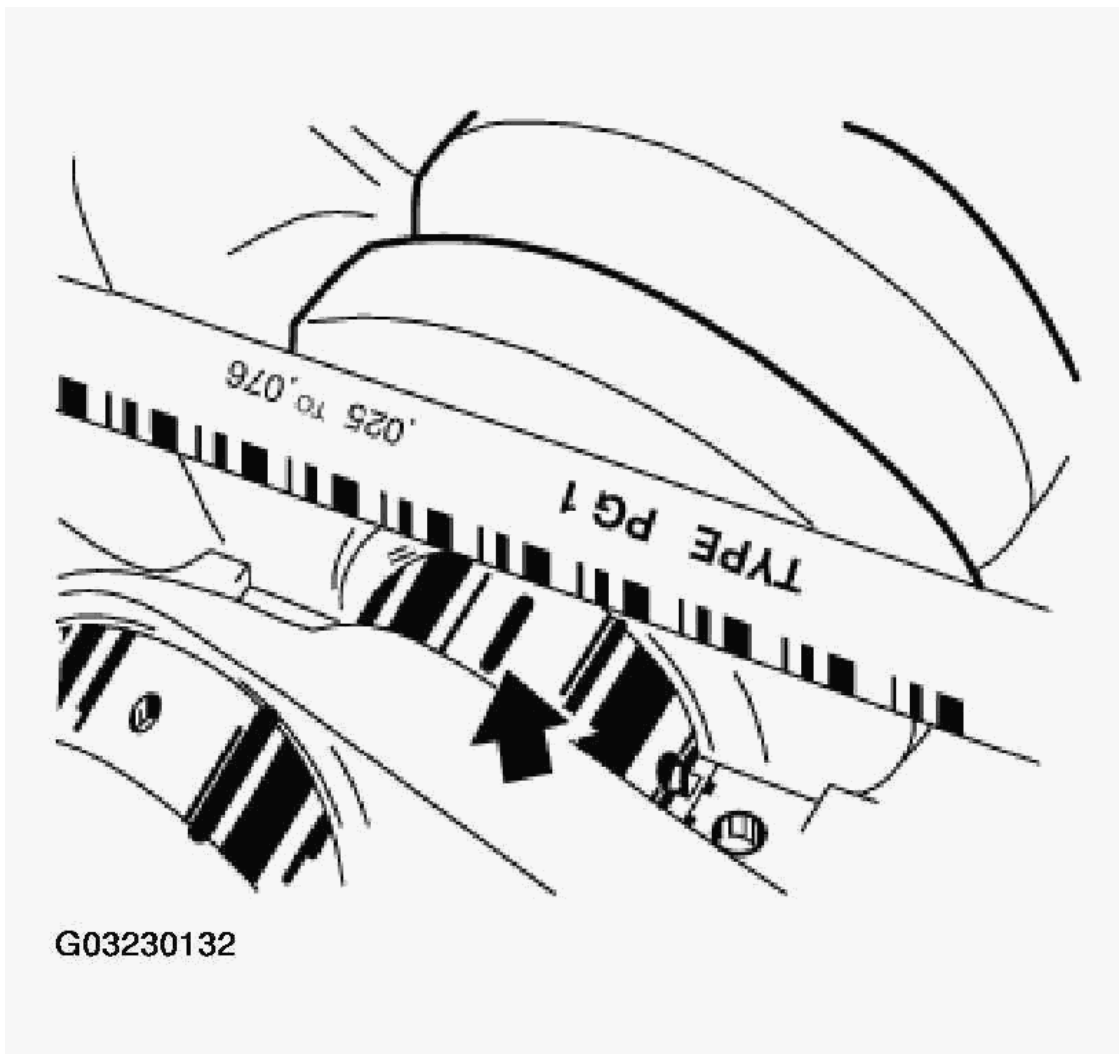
Using Measuring Scale To Read Bearing Clearance
